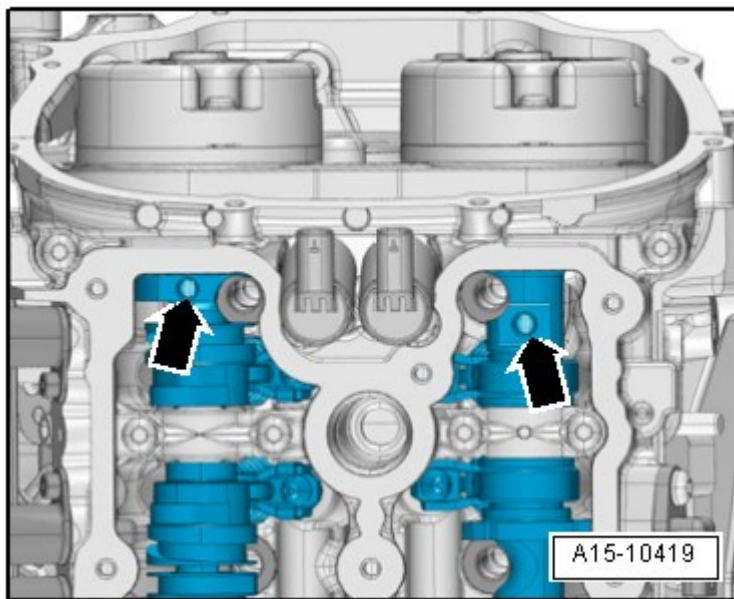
Identifying Camshaft Threaded Hole Alignment
